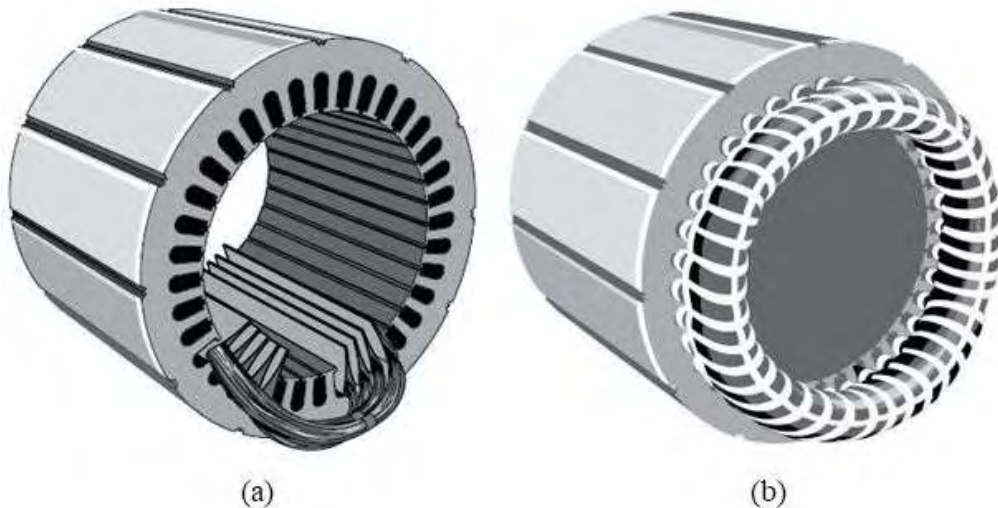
Stator with (a) partially completed winding and (b) completed winding
